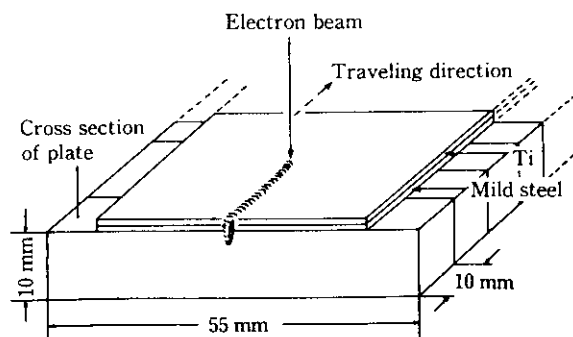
Preparation of the specimen having brittle weld crack
